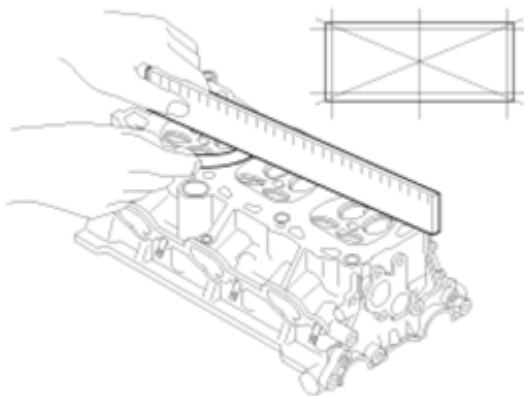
Measuring Cylinder Block Contacting Surface Using Straight Edge And Feeler Gauge
